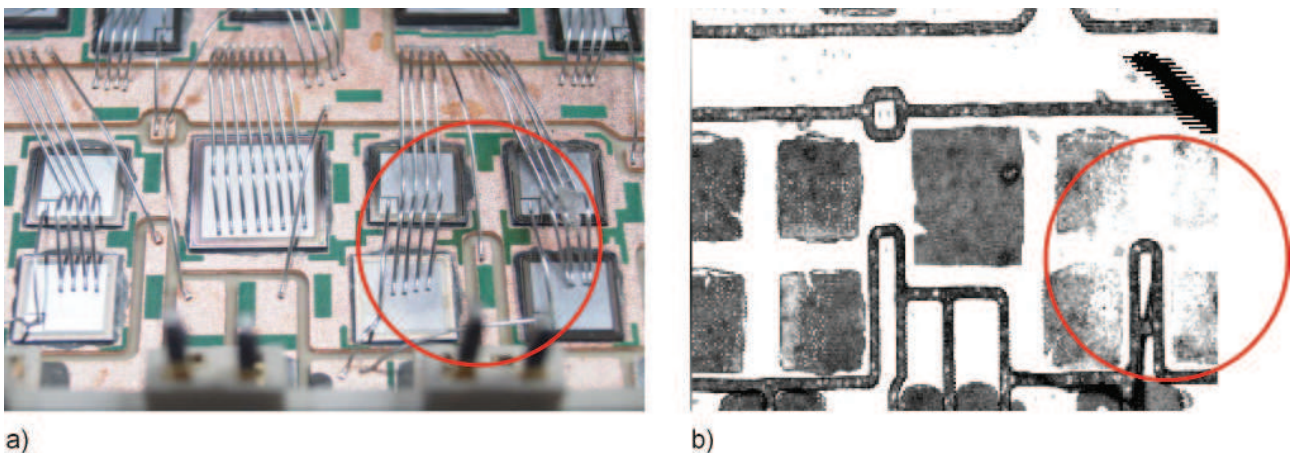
Chip solder fatigue caused by power cycling test, a) Photograph, b) Ultrasound image
